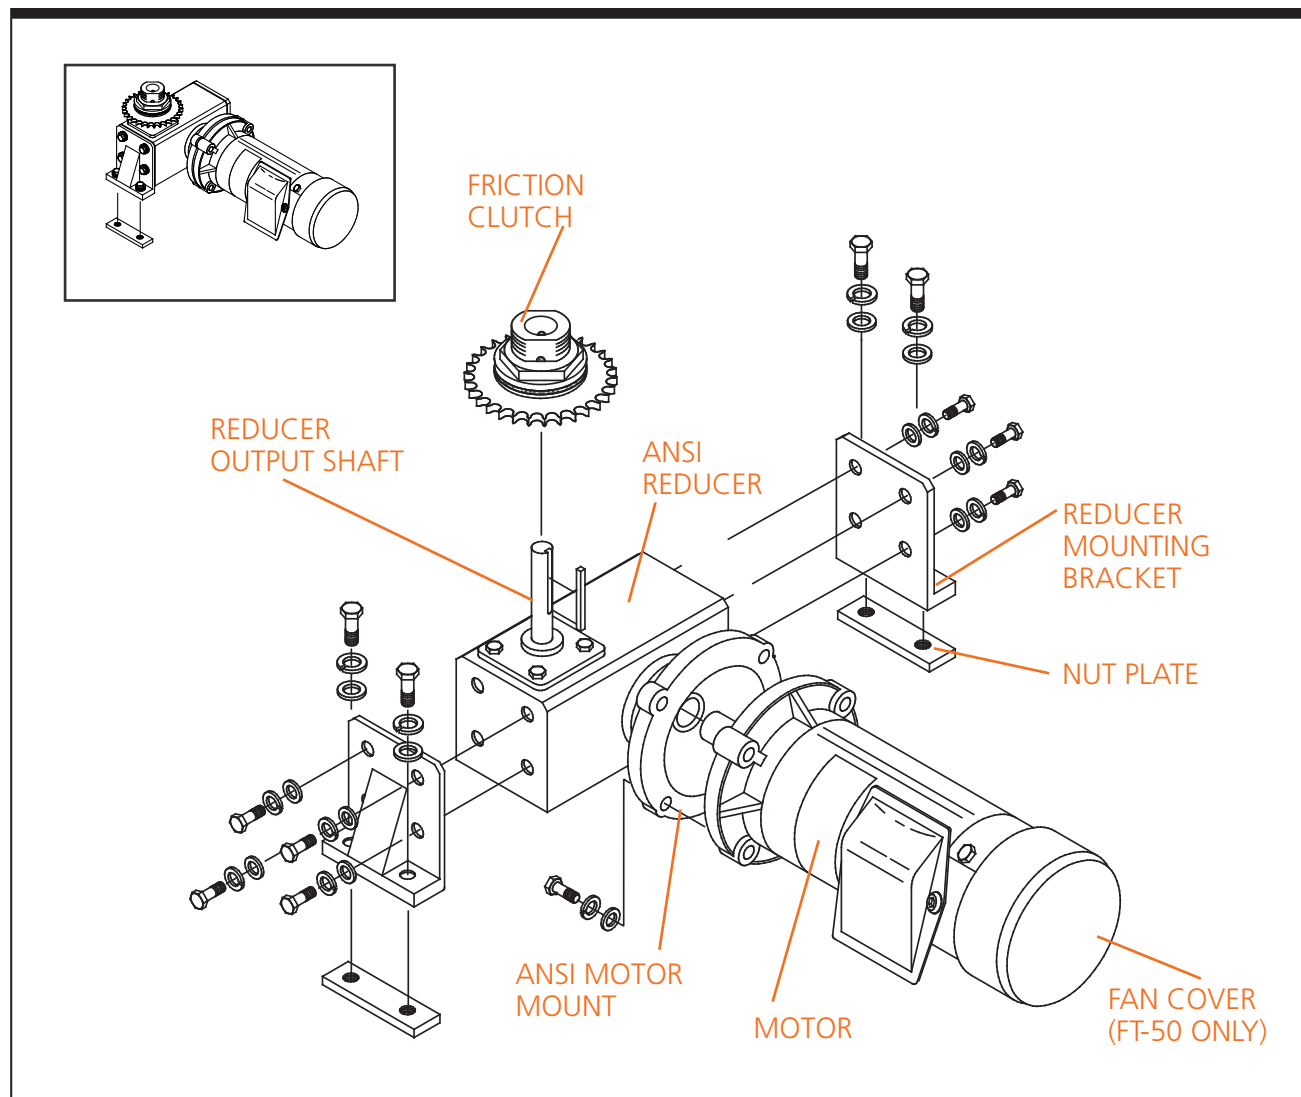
ANSI Reducer, Motor and Clutch Exploded View
